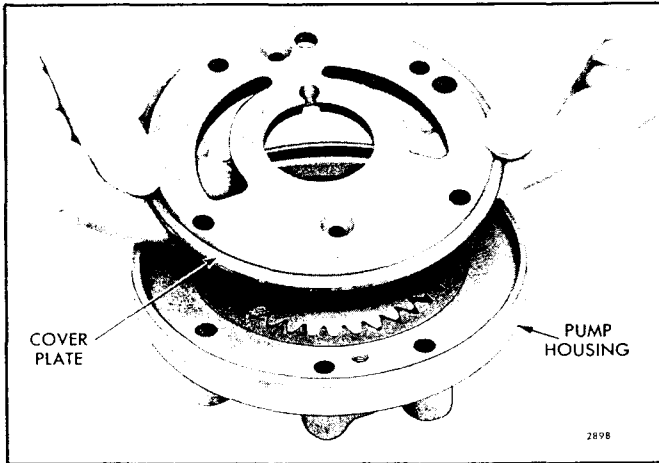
Installing Oil Pump Cover Plate on Oil Pump Housing
